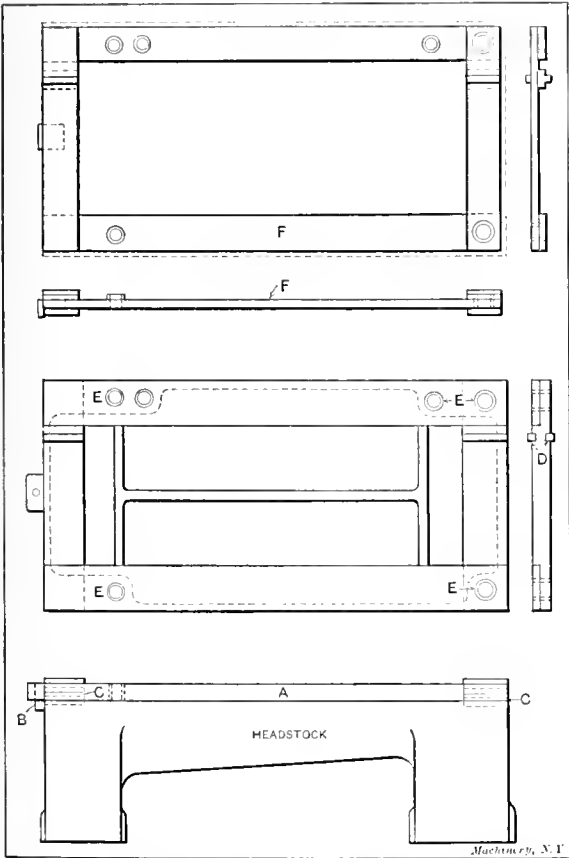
Application of a Wooden Jig for Drilling a Lathe Headstock. At *F* is shown a Similar Jig constructed of Flat Bar Steel
